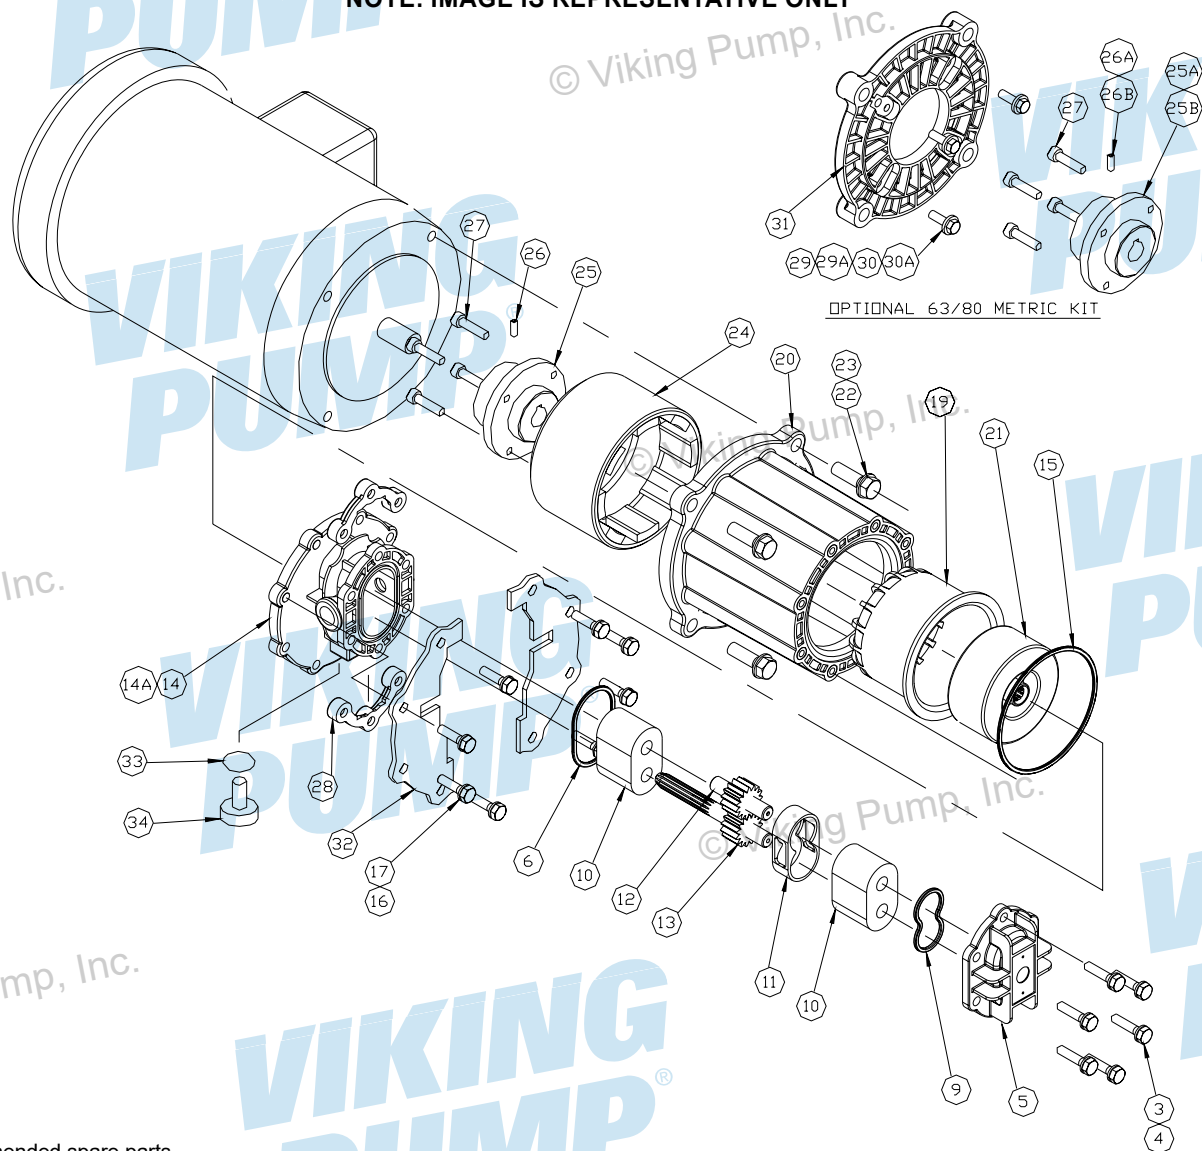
EXPLODED VIEW E02 PUMP (TYPICAL)
